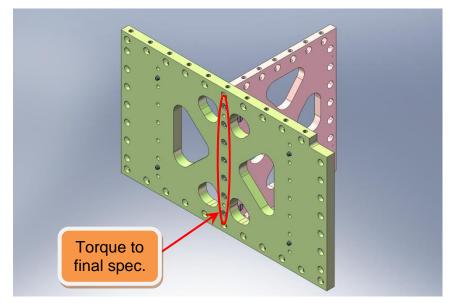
Partial assembly of Pitchfork. Screws should be torqued to final spec, before continuing.
